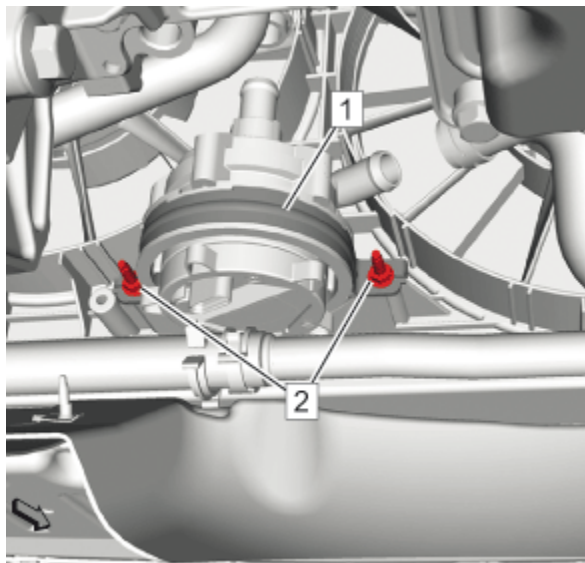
Drive Motor Battery Coolant Pump Bracket Stud
